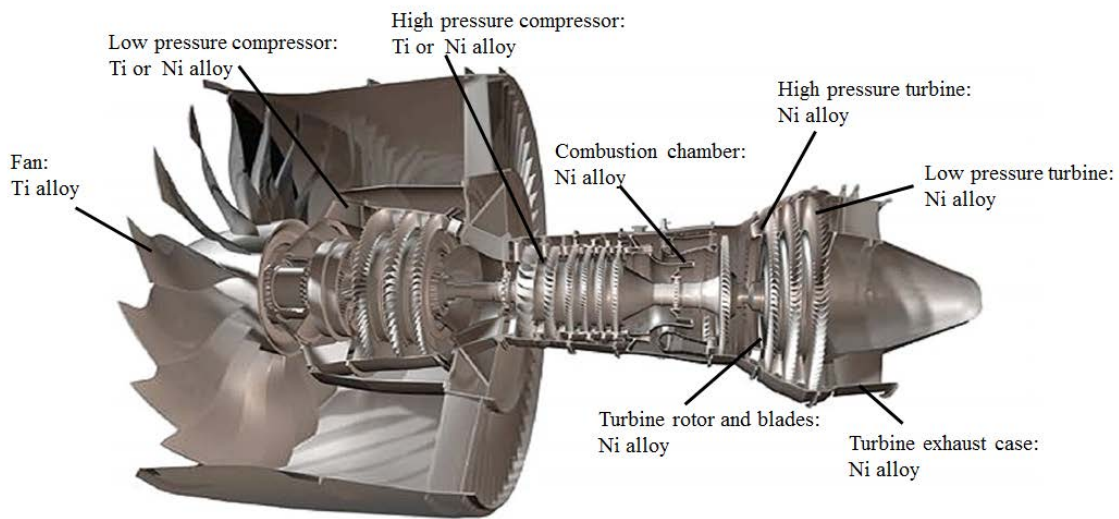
Aircraft engine modules (courtesy of Pratt and Whitney)
